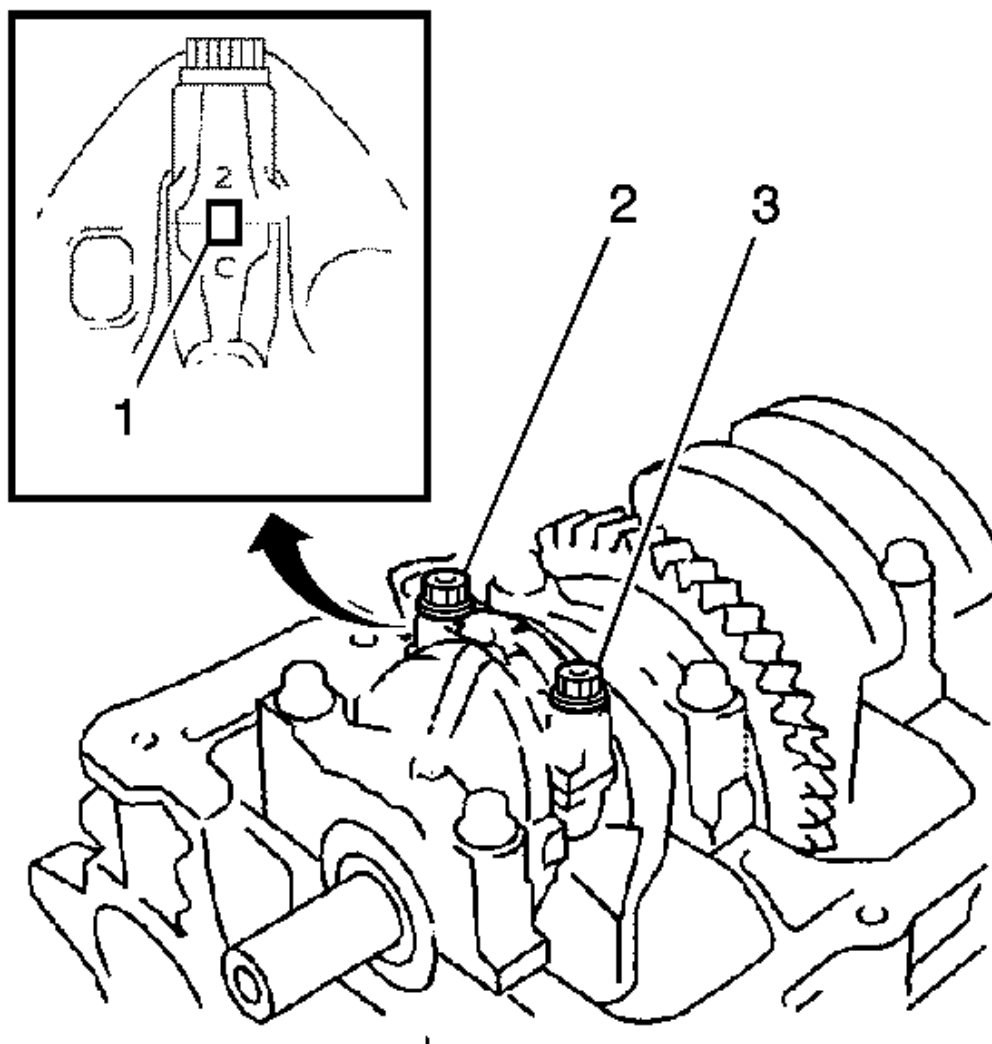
Checking Matchmarks For Correct Connecting Rods & Caps Positioning
